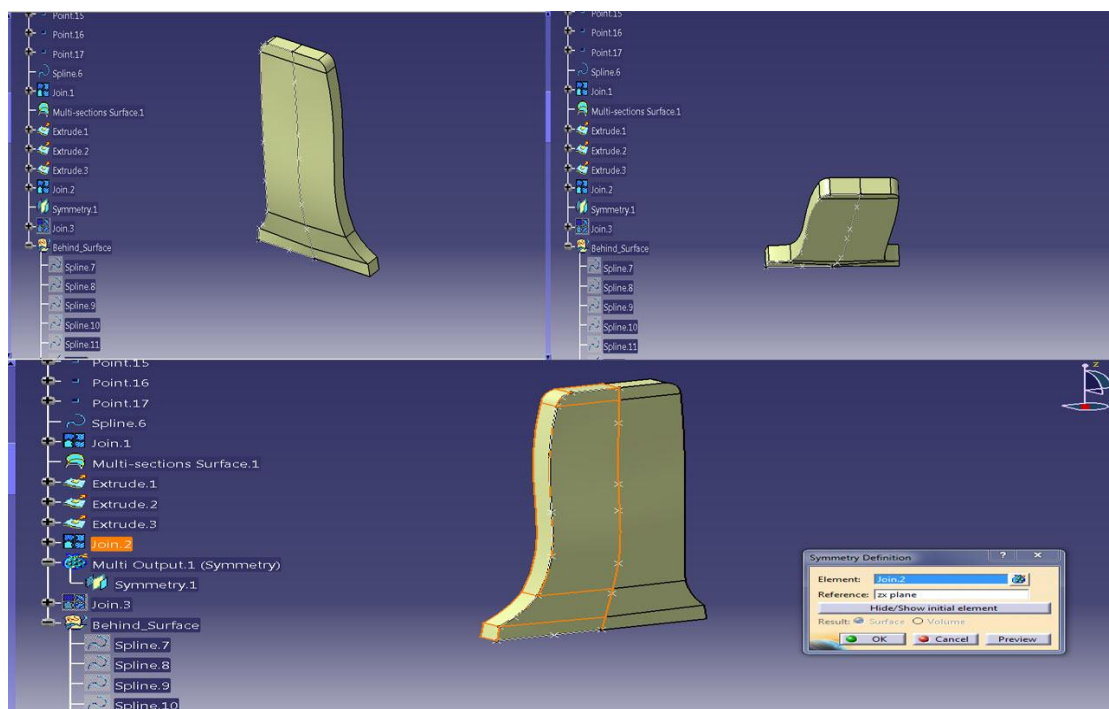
Throttle's pedal pad wireframe section.
